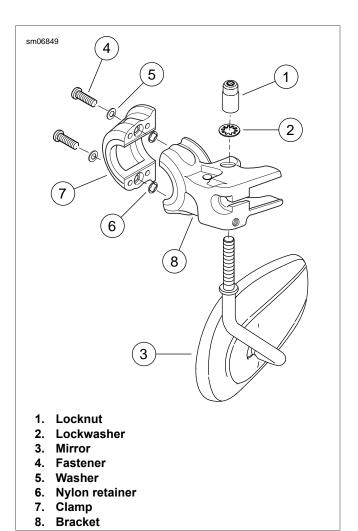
Clutch Hand Control Bracket: XL 1200X
